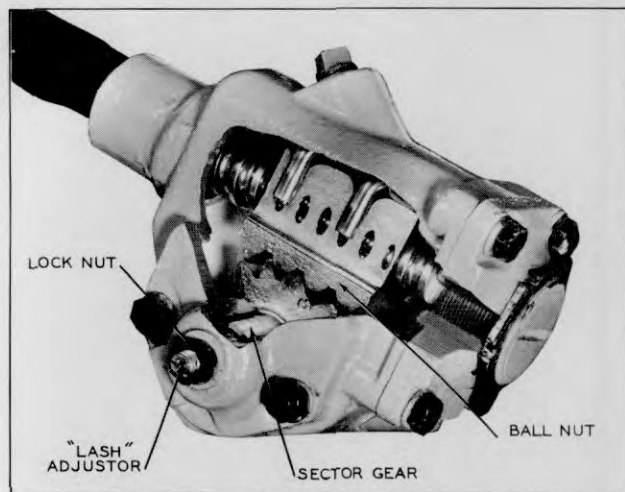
Steering Gear Lash Adjustment (Sector Gear)
